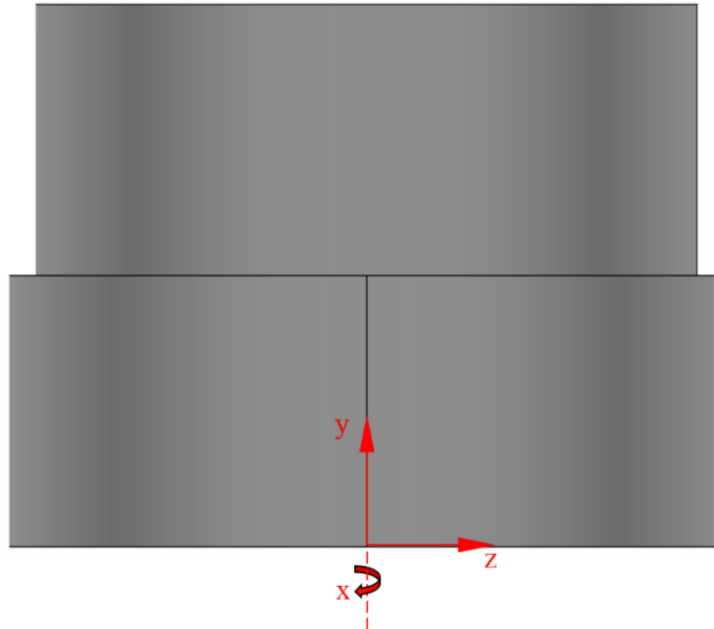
The coordinate system for foil bearing assembly and the shaft
